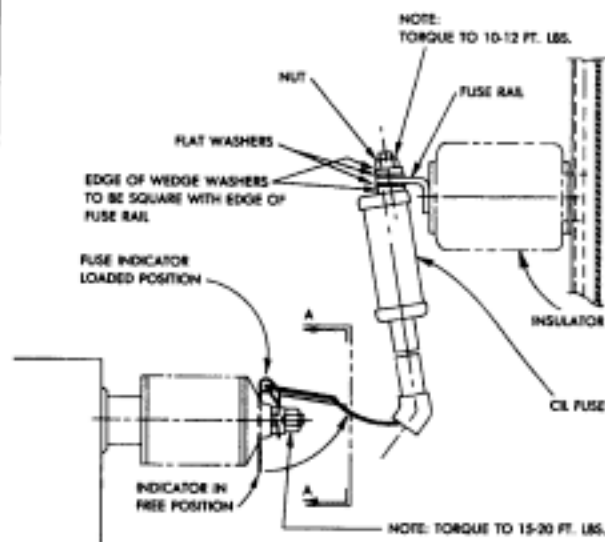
shows the fuse mounting of the *CIL replacement fuse* into an existing metal enclosed equipment with an edge mounted capacitor. Refer to Figure 4 for the details on the use of the wedge and flat washers supplied.
